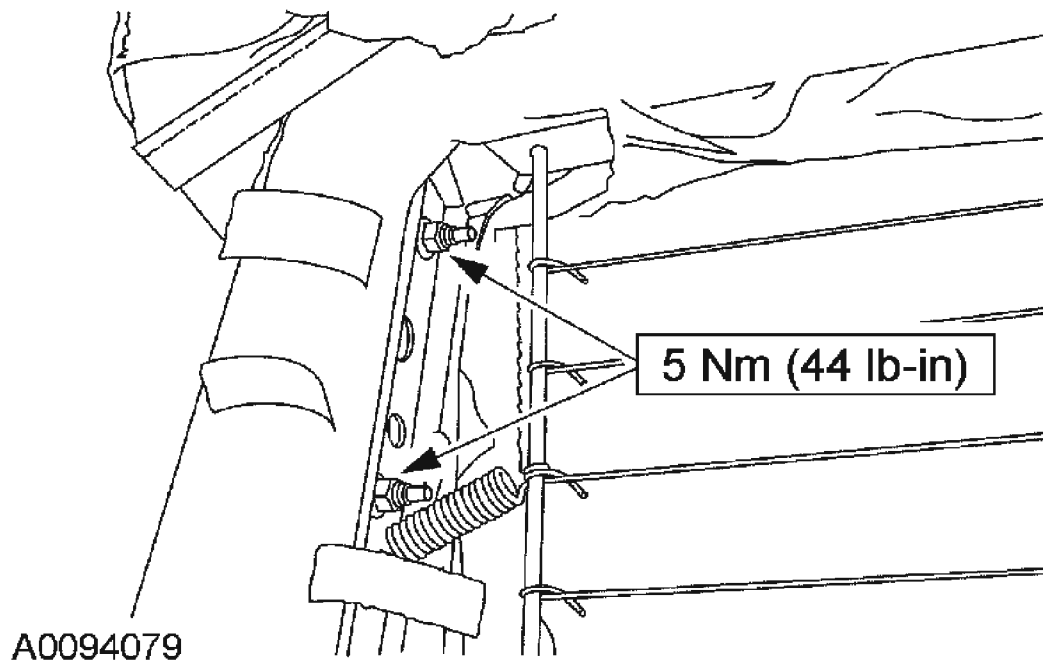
Removing Nuts, Side Air Bag Module And Side Air Bag Module Liner
